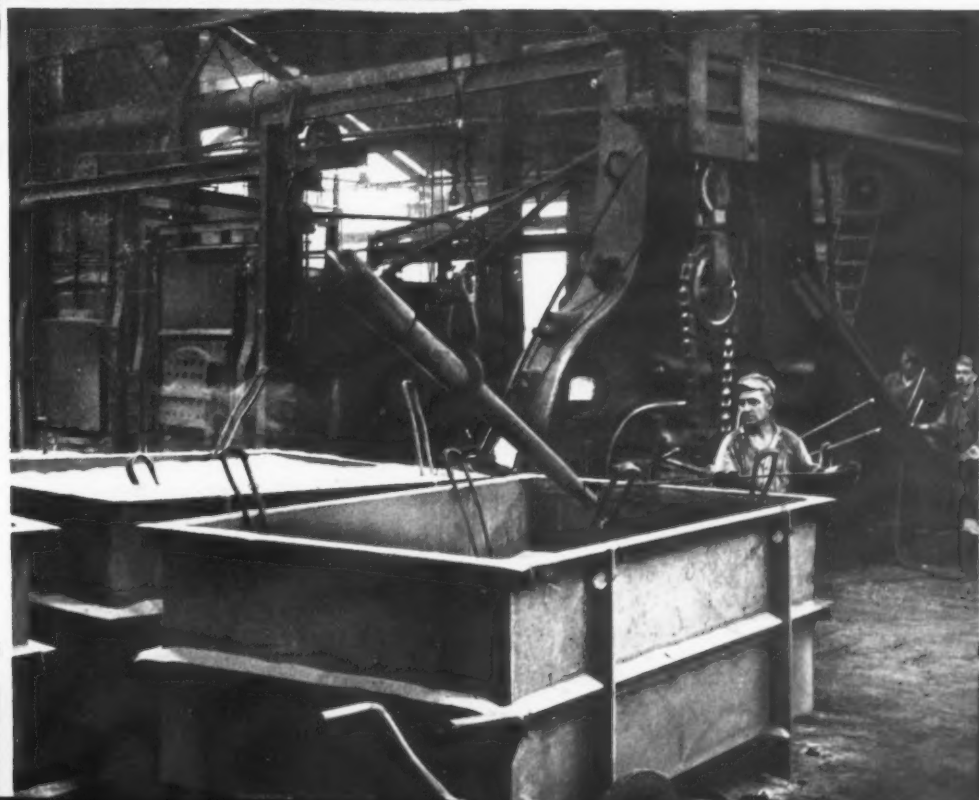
Hammering a Heavy Billet into a 57-millimeter Gun Forging under a 6000-pound Steam Hammer
